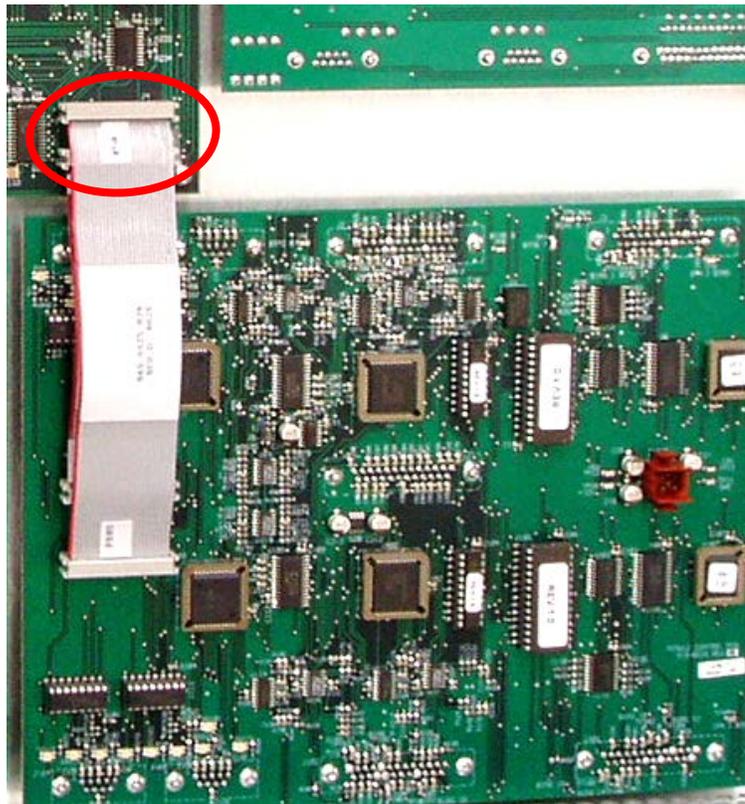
Connect Ribbon Cables back to the Supervisor Board
